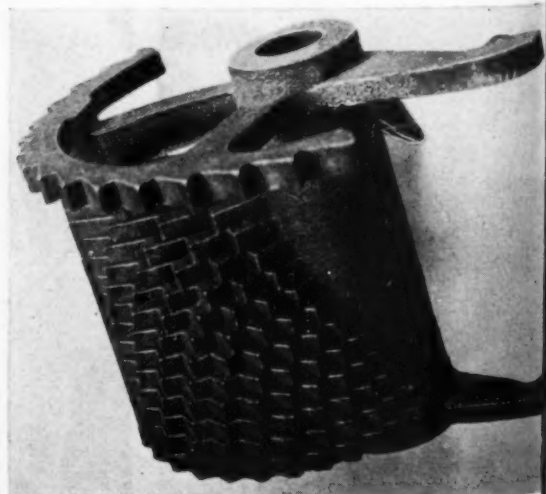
Left—Gated pattern for a rotor disk showing size of sprues used. Other patterns include a conveyor crank and turbine blades
